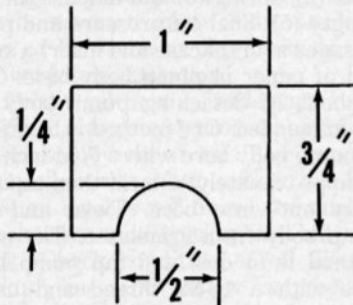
Shims used in crankshaft assembly may be made by cutting 0.015 inch thick plastic, metal or other suitable material in the outline shown above. Refer to Fig. HL244 and text.
